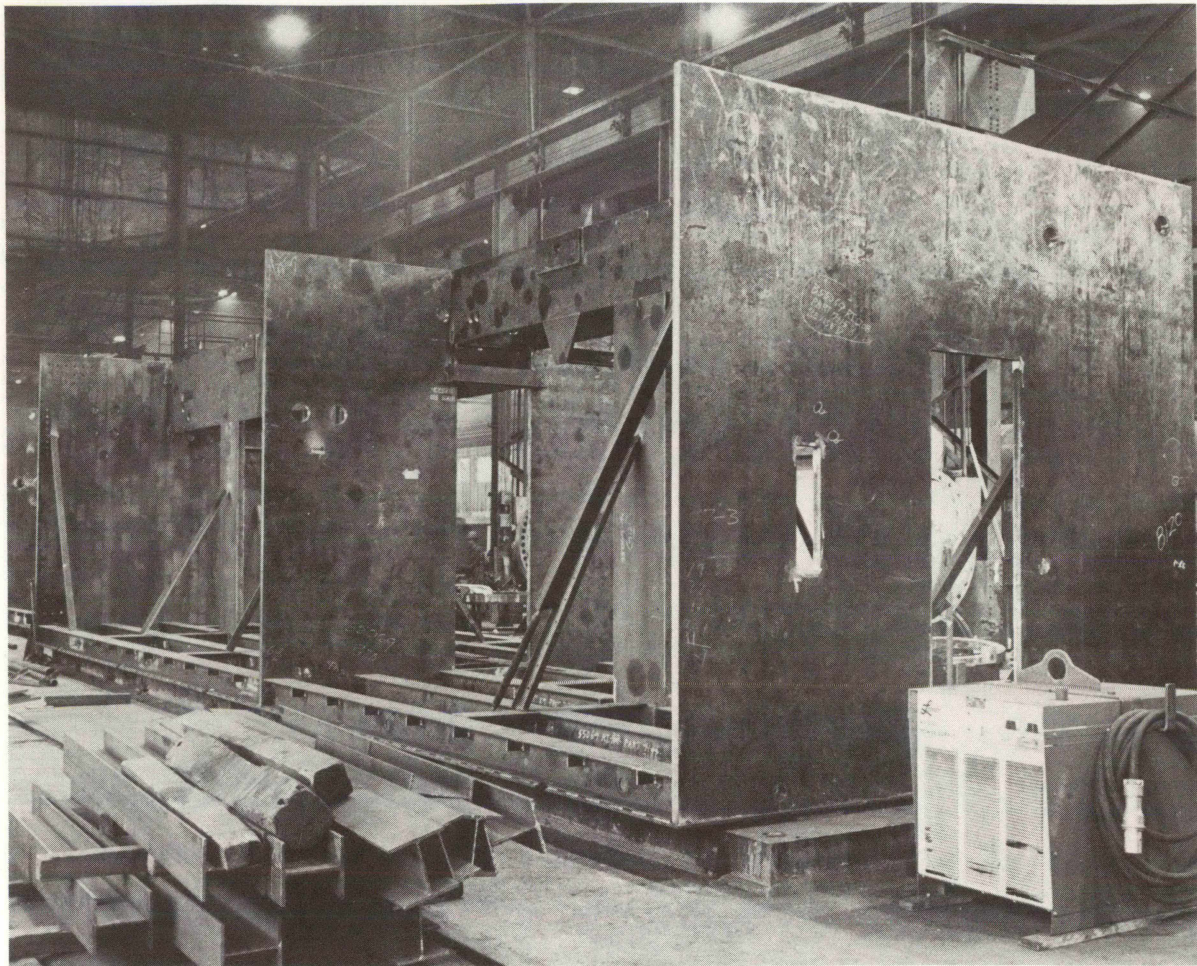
Initial Fabrication of Steel Shell—Equipment Section.
